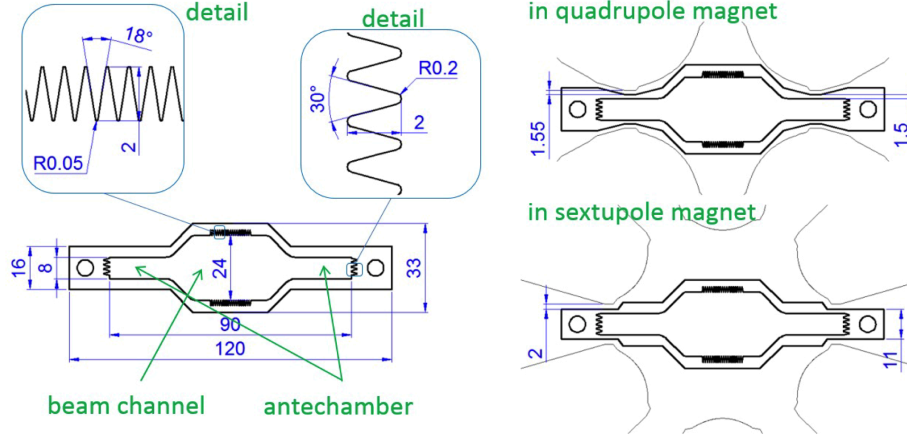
Typical cross-section of the beam pipes in the arc sections. The beam pipes have antechambers with height 8 mm on both sides of the beam channel. They have grooved structures at the top and bottom of the beam channel to reduce the secondary electron yield, and at the side wall of the antechambers for the antireflections of the SR.
